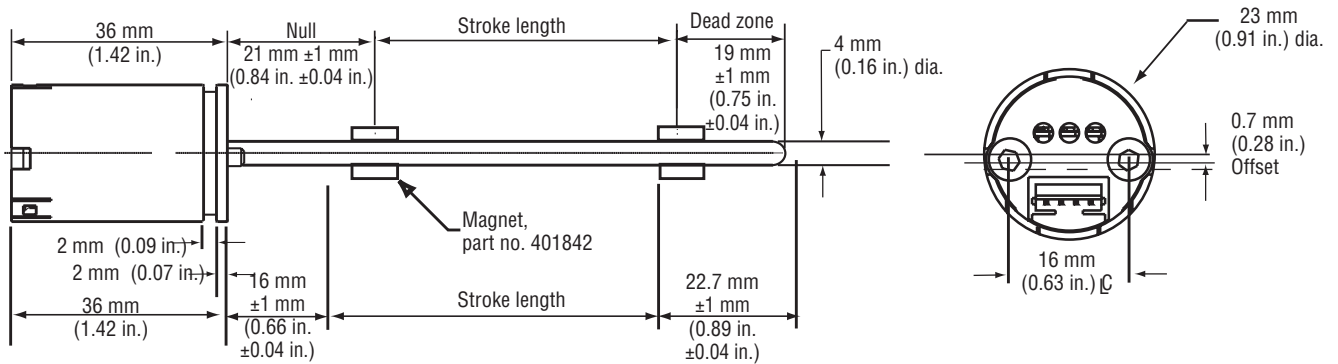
C-Series Core sensor, Models CS/CM dimension references
